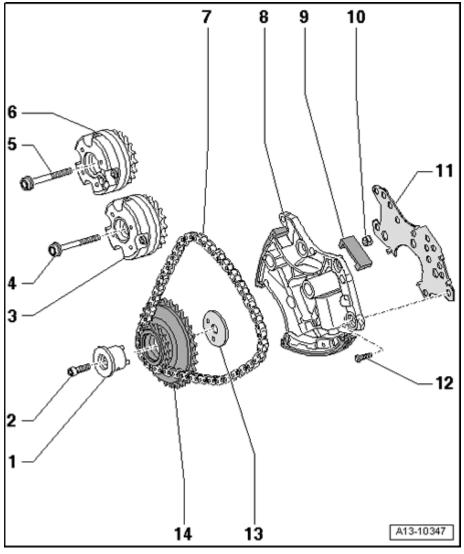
Camshaft Timing Chain, Assembly Overview (Right Camshaft Timing Chain)
